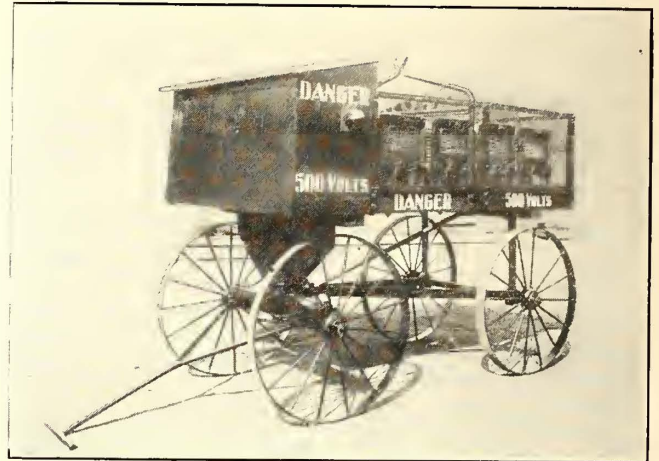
PORTABLE RHEOSTAT OUTFIT FOR ELECTRIC ARC WELDING OF RAIL JOINTS
